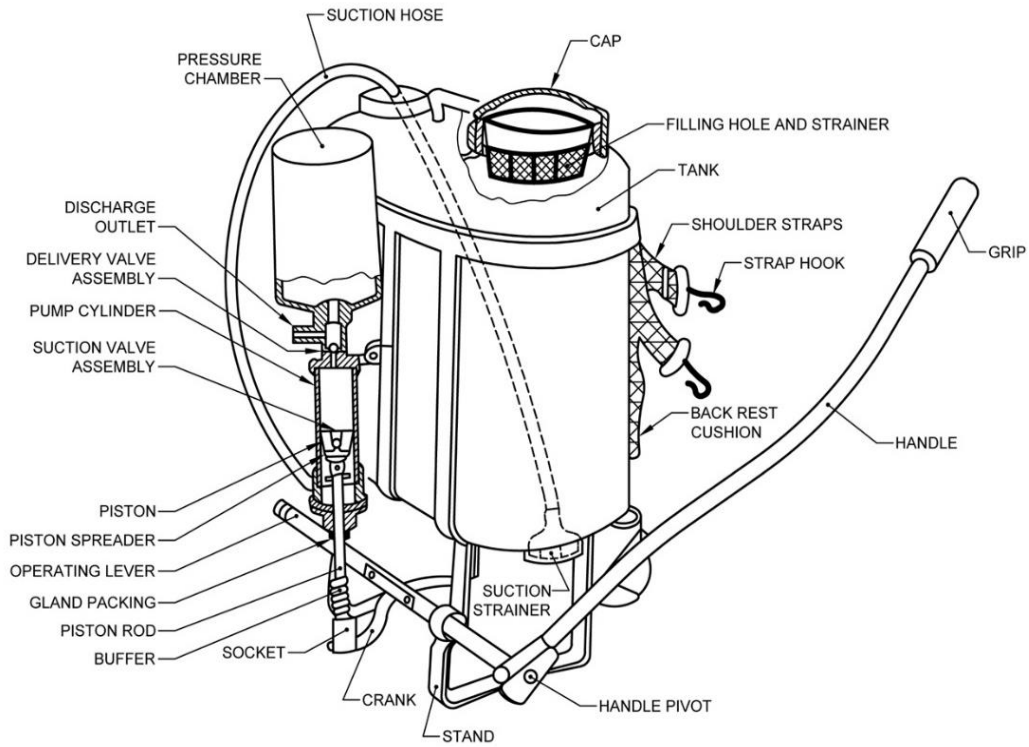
KNAPSACK SPRAYER, PUMP ASSEMBLY OUTSIDE TANK
